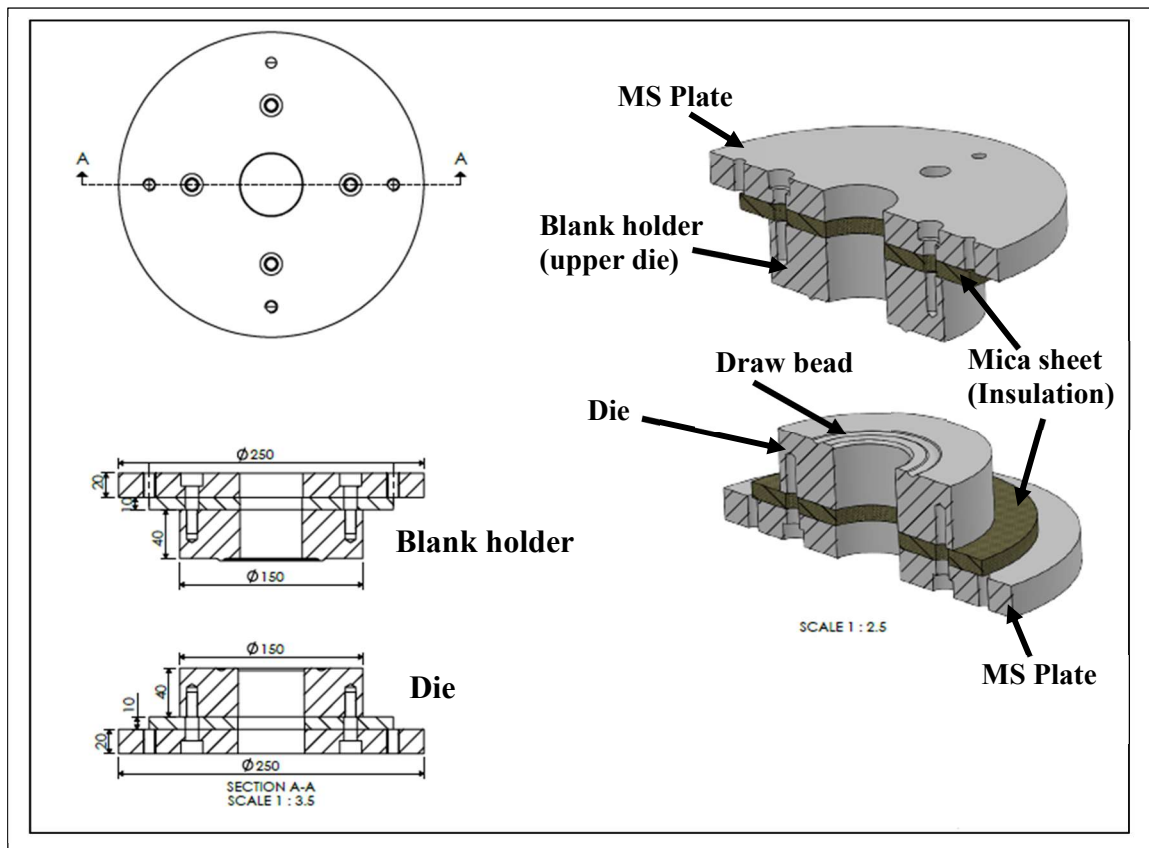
Engineering drawing and solid model of the die and blank holder assembly
